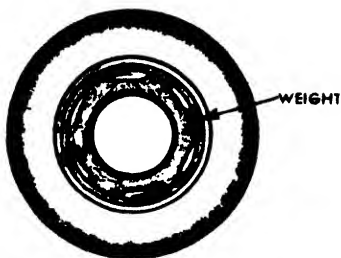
BALANCING WEIGHTS OF AUTOMOBILE WHEEL.
